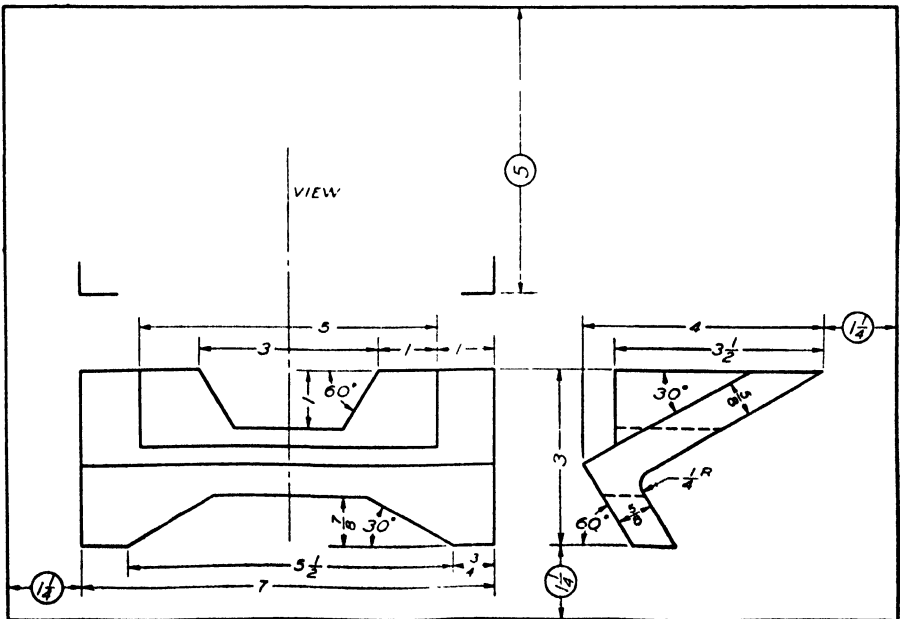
Prob. 120. Draw three complete views of the separator.
